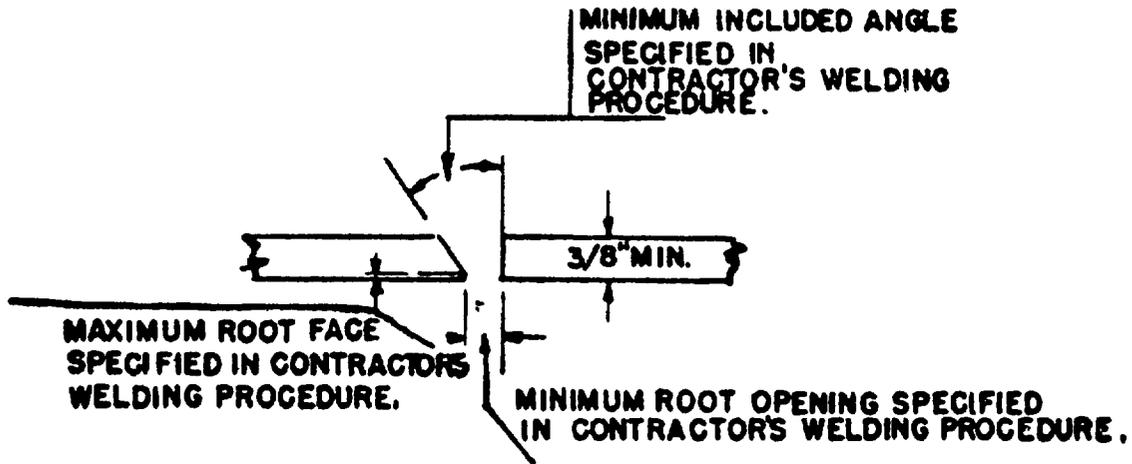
Test-weld specimen (butt joint) ($\frac{5}{8}$ -inch or less).
